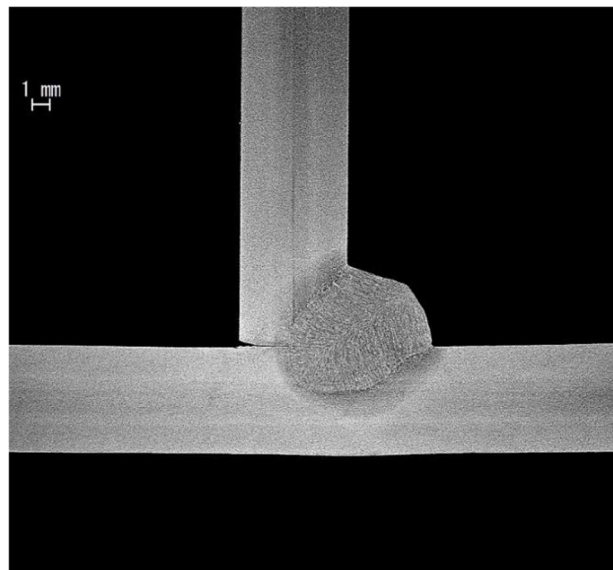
Macroscopic observation for fillet joint by Laser-arc hybrid welding
